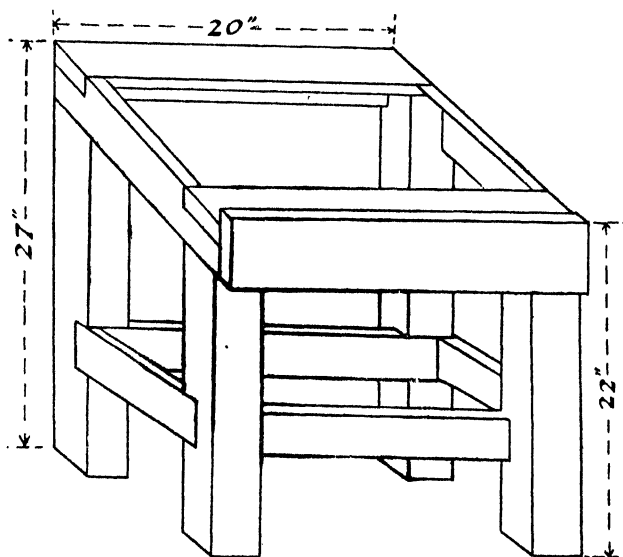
PACKING STAND TO HOLD TWO CASES.
